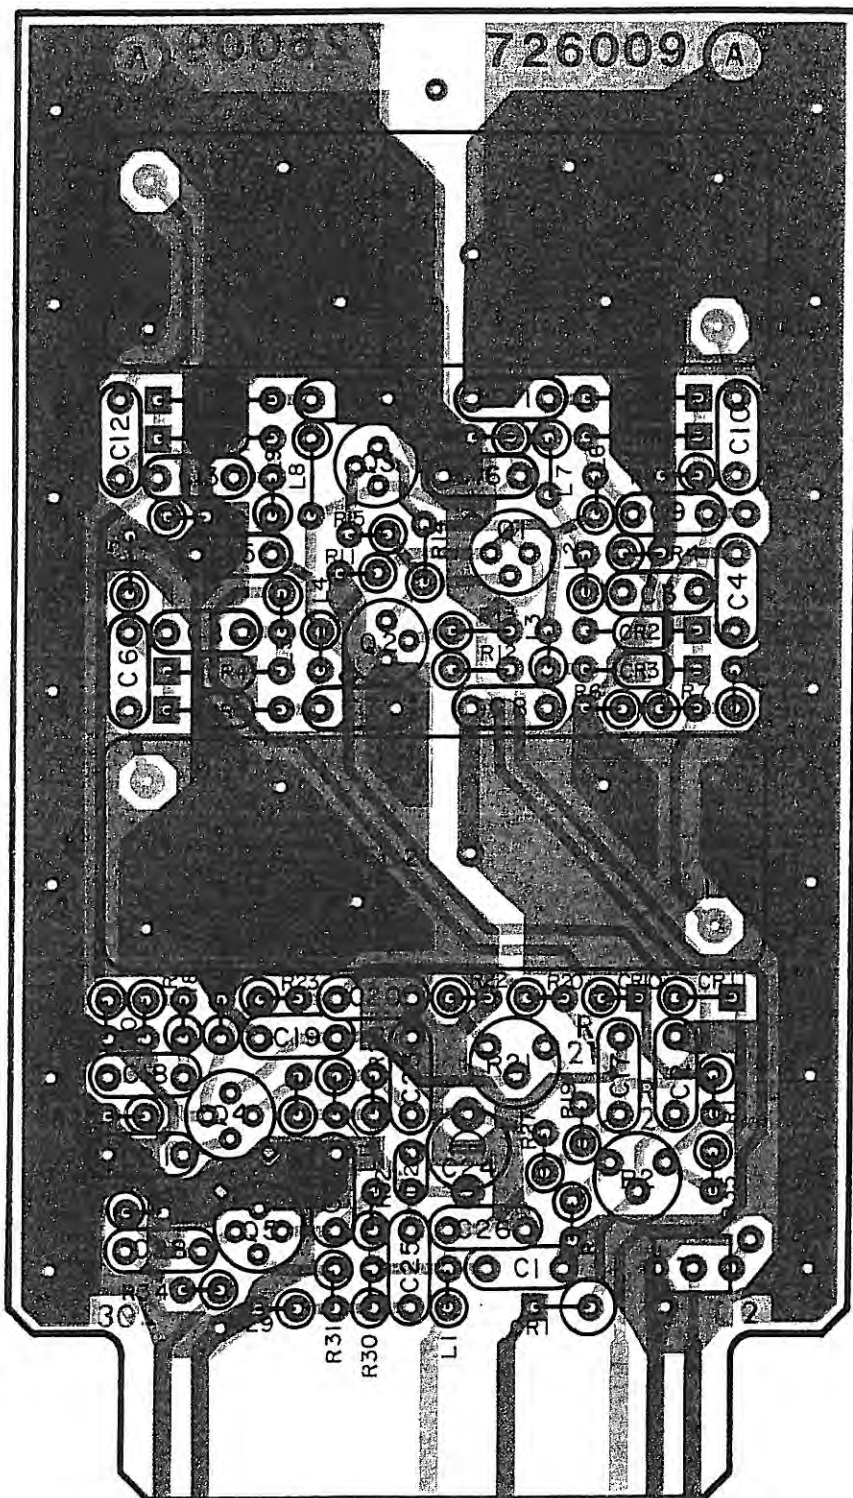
Type 726009-X Switchable IF BW Filter (A3A17-A3A21), Location of Components
